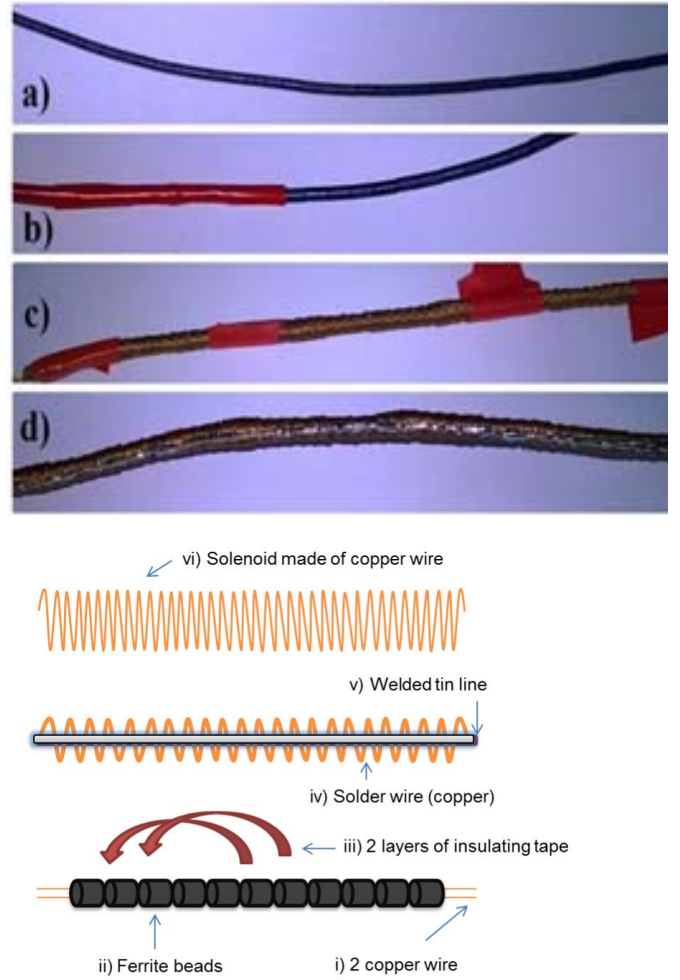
Construction steps of the coaxial line are shown (top). (a) Copper wire inside the ferrite beads. (b) Insulating tape layer. (c) Solder wire layer. (d) Welded tin line. The schematics of the construction steps assembled into the solenoid are shown (bottom).
